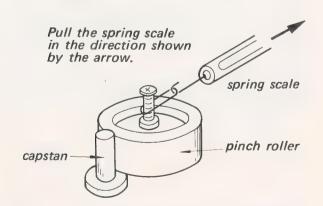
Pinch roller pressure adjustment (2)
